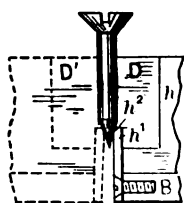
Manner of Supporting Blanks Between the Dies.
